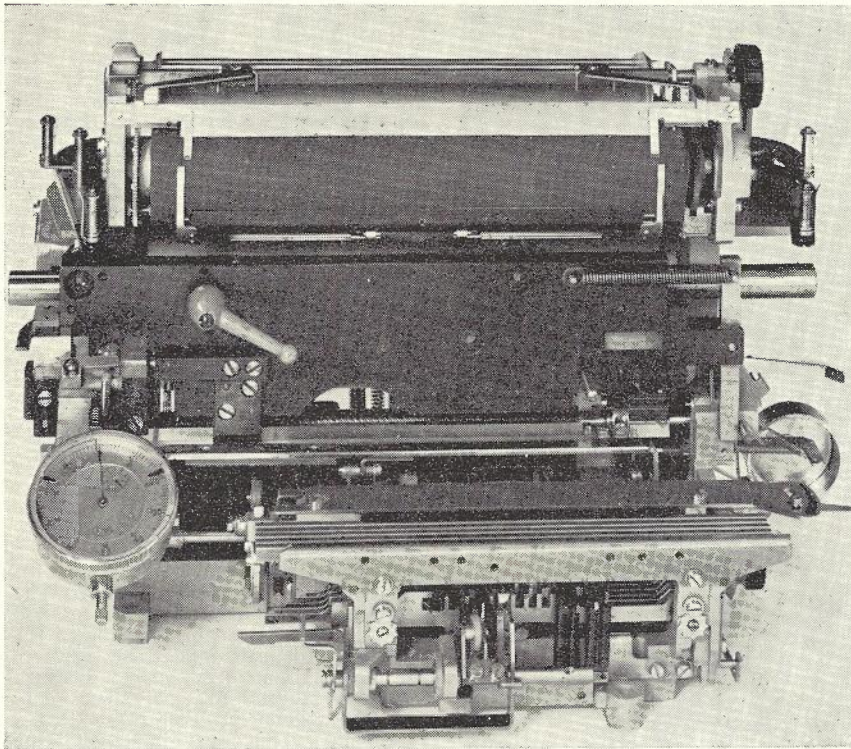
Adjustment of Beginning-of-the-Line-Unit in Printer Base (Test Piece Below) for Type Basket (Fixture on Top).
